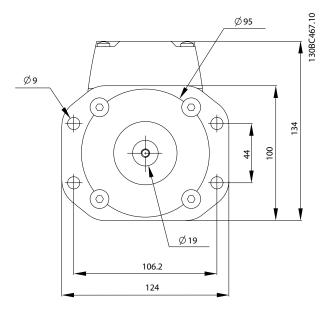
Front View: Servomotor with ISD Flange, without Brake
